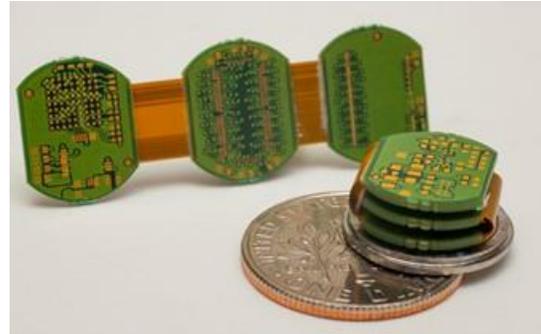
Optical Images of the Fabricated Rigid Flex Board, as-received and folded onto the feedthrough plate.
